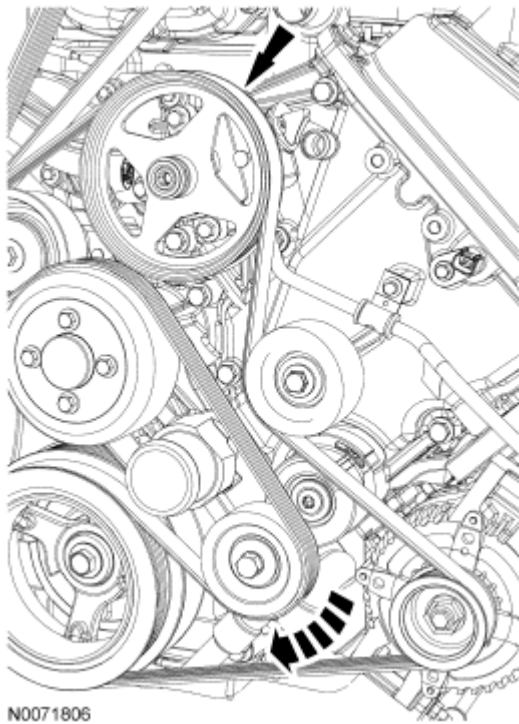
Rotating Accessory Drive Belt Tensioner Clockwise & Removing Accessory Drive Belt
